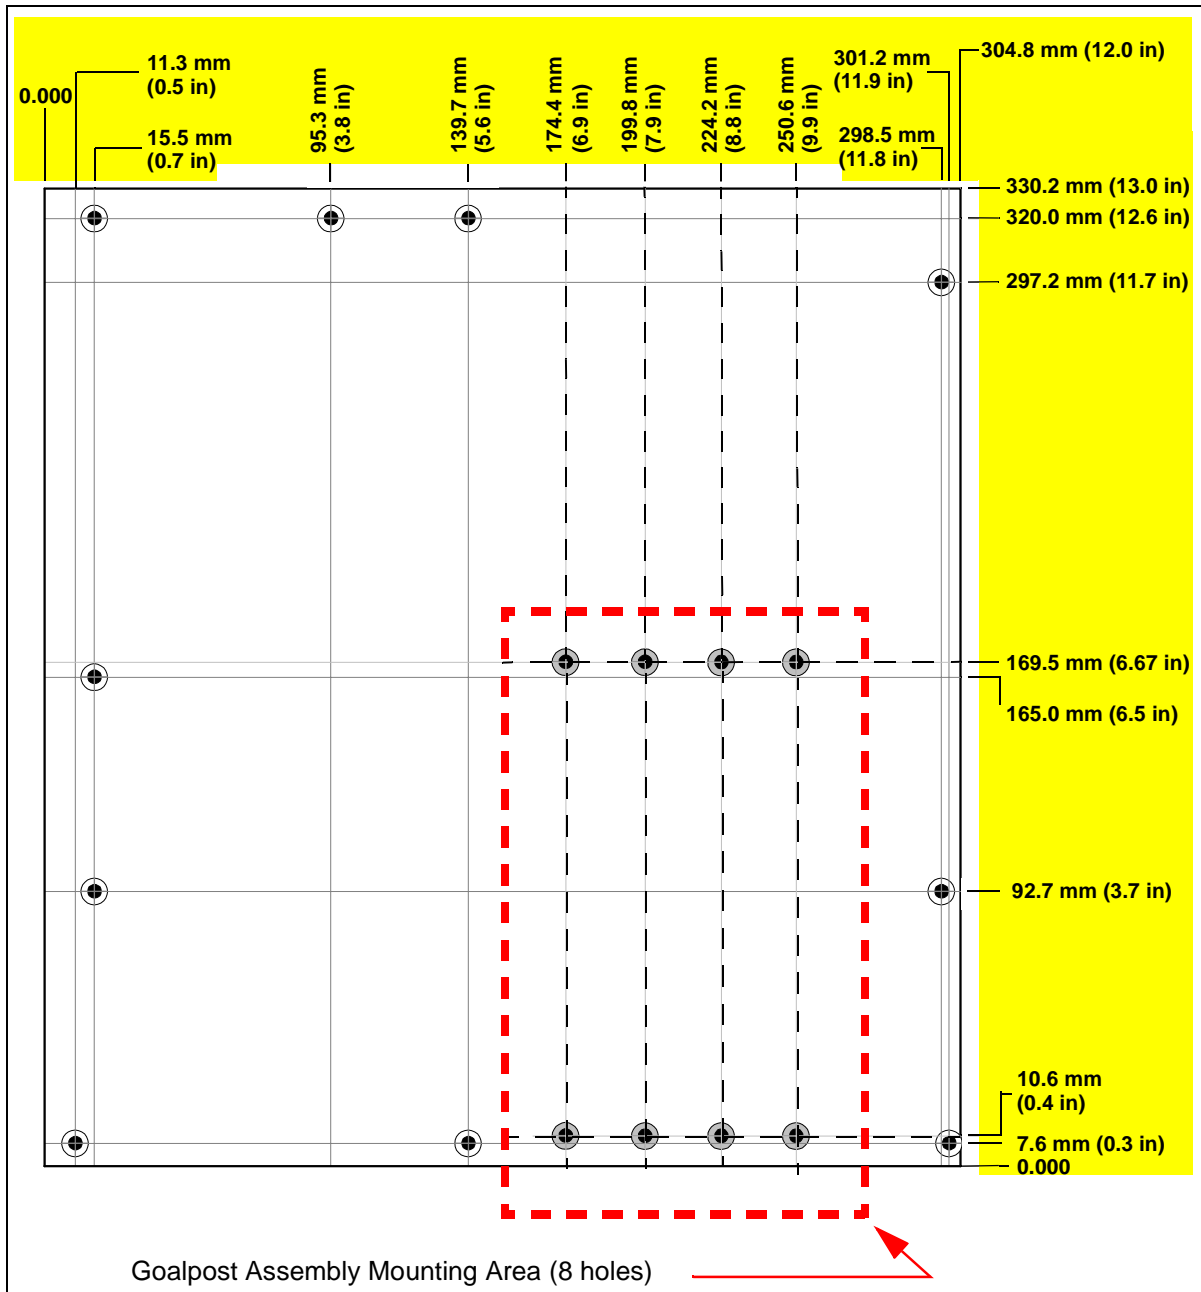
UP2000 Motherboard Mounting Hole Specification
